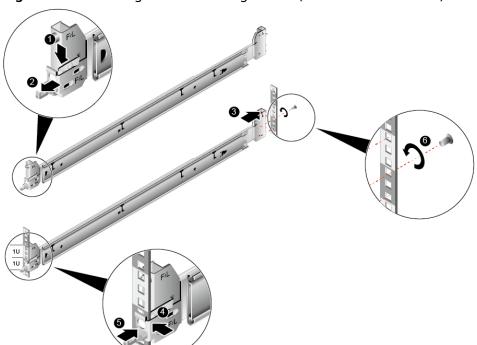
Installing the ball bearing rail kit (BOM code: 21241258)
